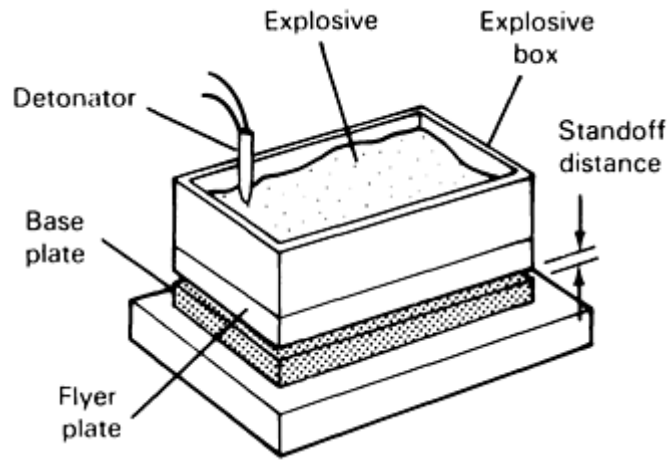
SCHEMATIC SHOWING KEY COMPONENTS USED IN THE PARALLEL GAP EXPLOSIVE WELDING PROCESS
